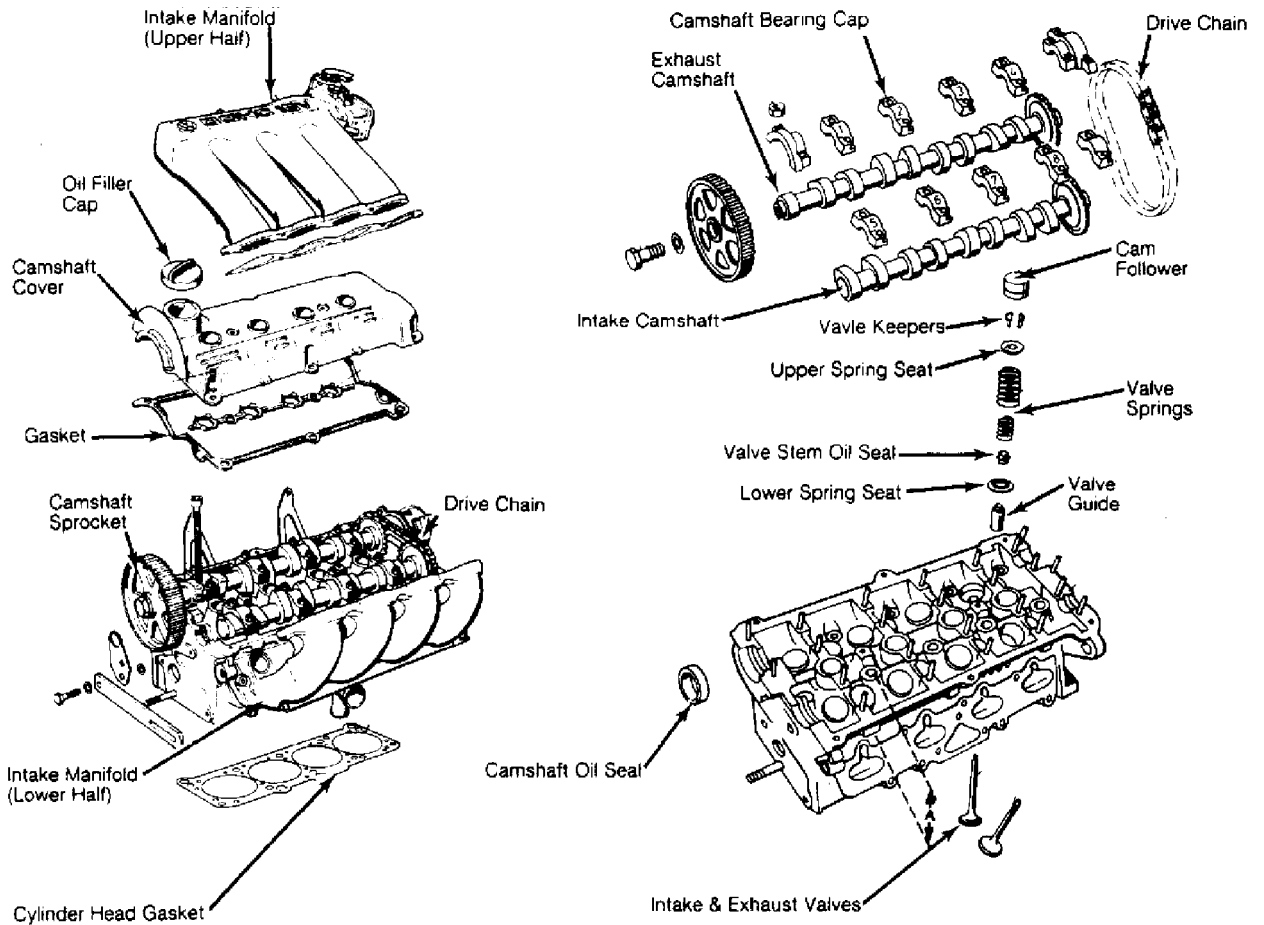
Identifying 2.0L Cylinder Head (16-Valve)
